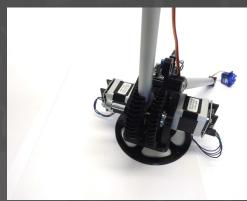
Slide the two long M8 spacers 31 onto the bolt with the chamfer facing the bearings. Slide the secondary gear and washer on the bolt.
